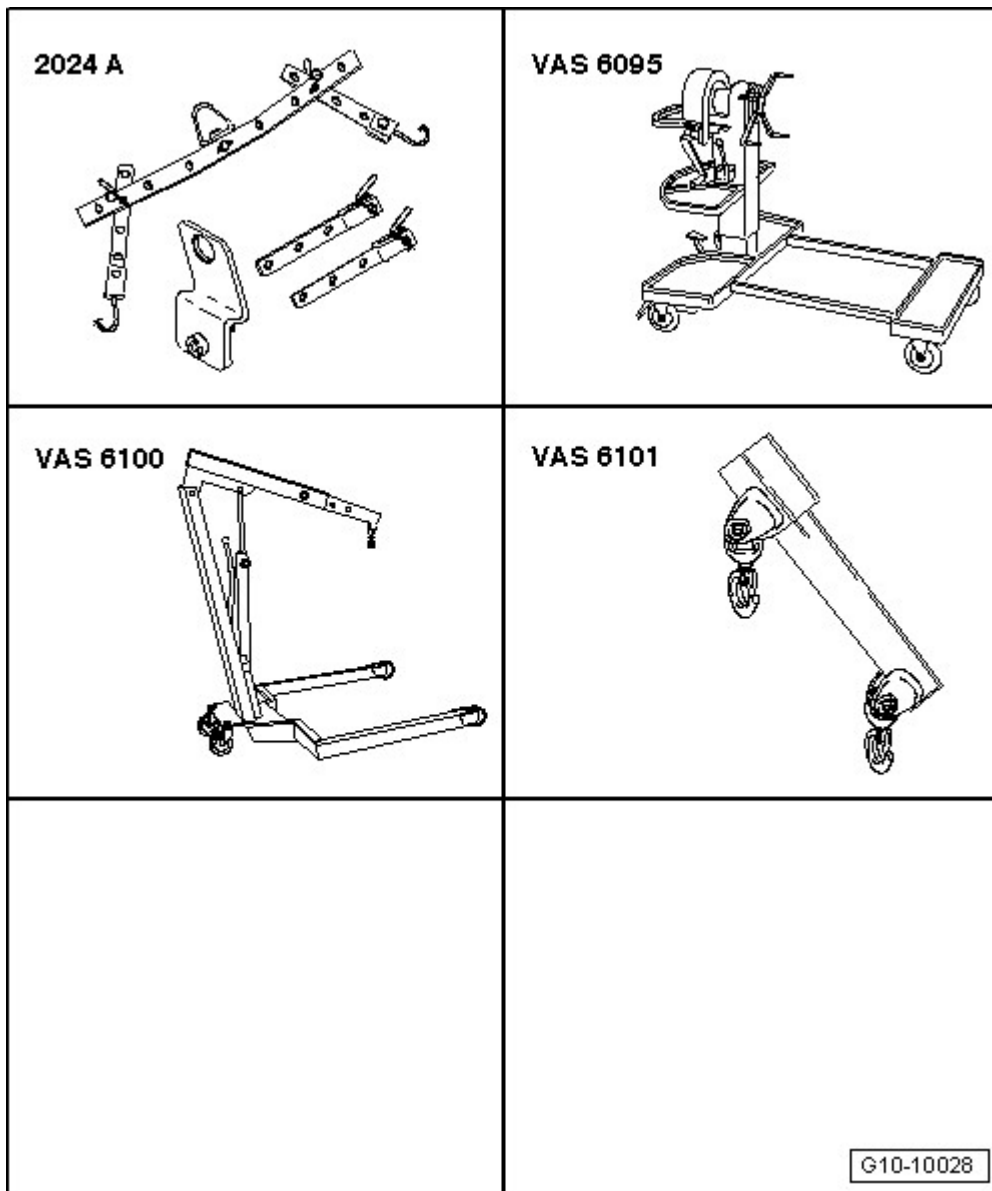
Identifying Special Tools -- Engine, Securing To Engine And Transmission Holder
